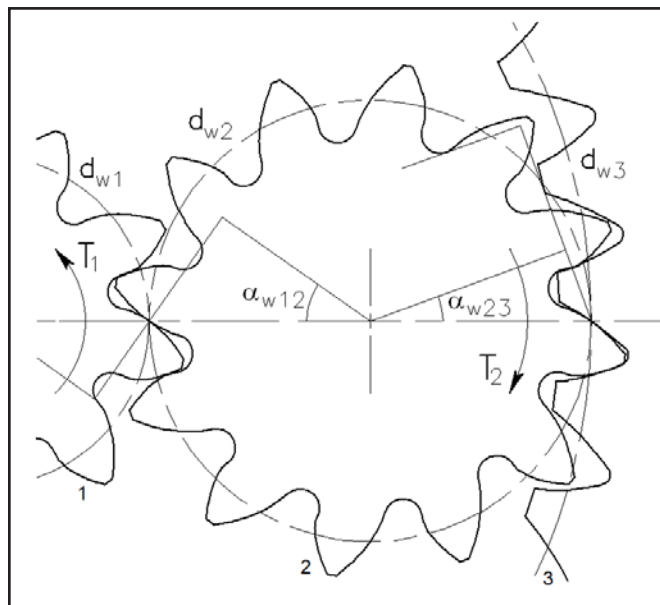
Planetary gear arrangement: 1 = sun gear; 2 = planet gear; 3 = ring gear.
